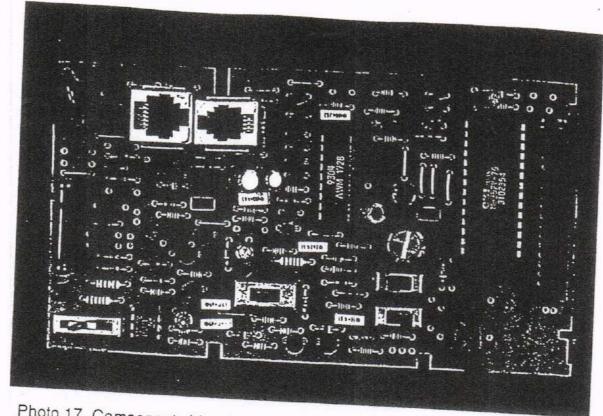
Component side of the printed board assembly showing date code but no evidence of residue
